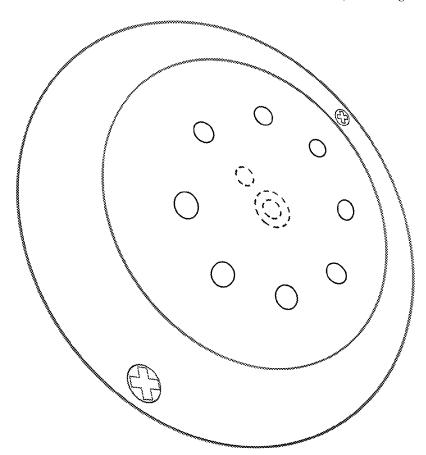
is left side elevational view thereof, the right side elevational view being mirror image;
